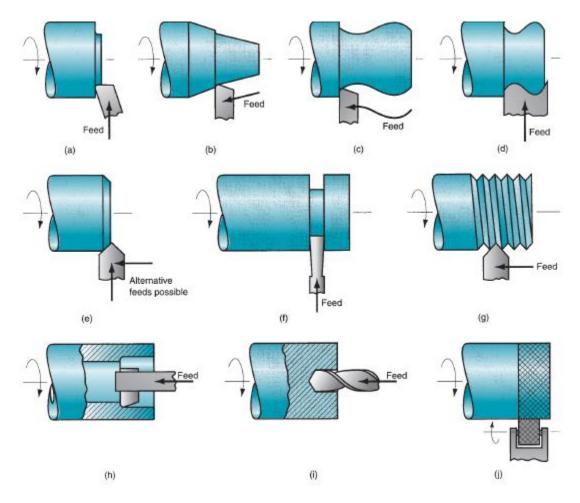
Machining operations other than turning that are performed on a lathe: (a) facing, (b) taper turning, (c) contour turning, (d) form turning, (e) chamfering, (f) cutoff, (g) threading, (h) boring, (i) drilling, and (j) knurling.
